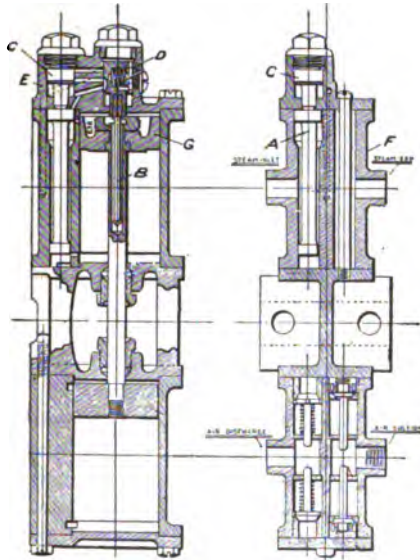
Sectional View of the Valve Motion and Mechanism of the "Victor" Auxiliary Steam Pumps.
